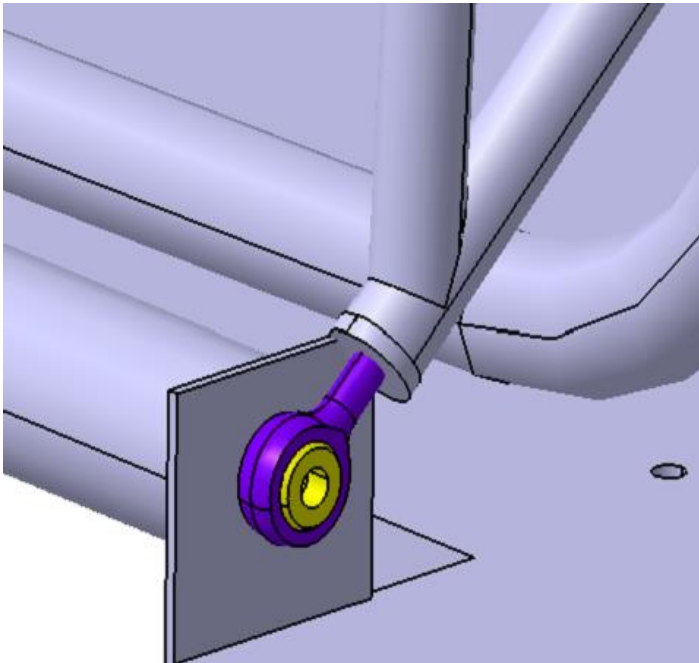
Linkage tube with rod end. Vertical tube is part of the exhaust mounting system.
